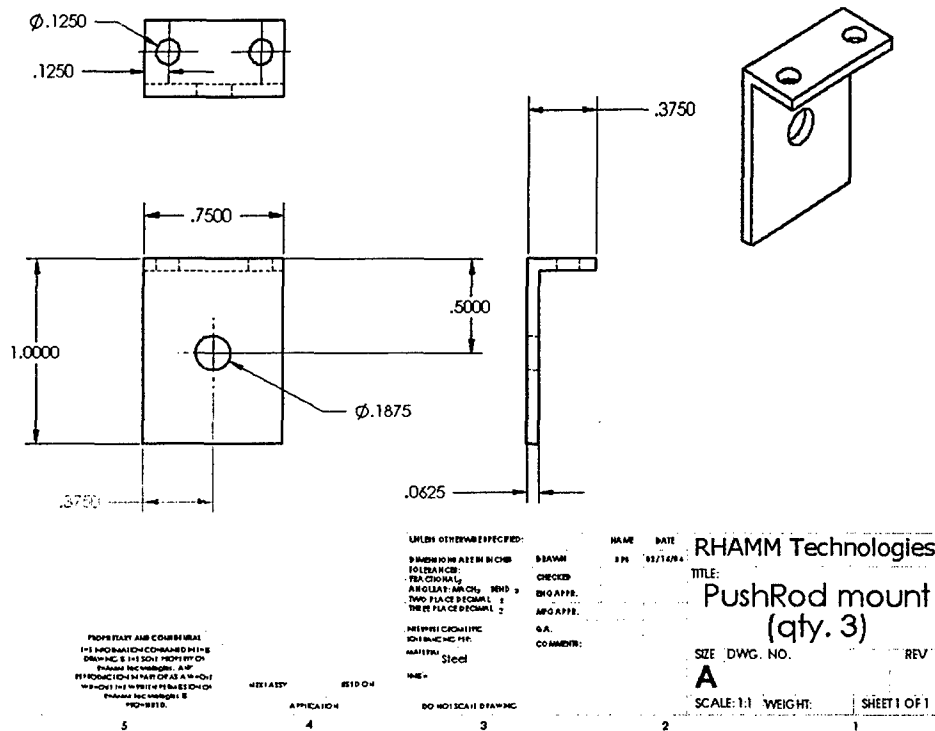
Drawing for DCB High Rate Experimental Apparatus: PushRod Mount.
